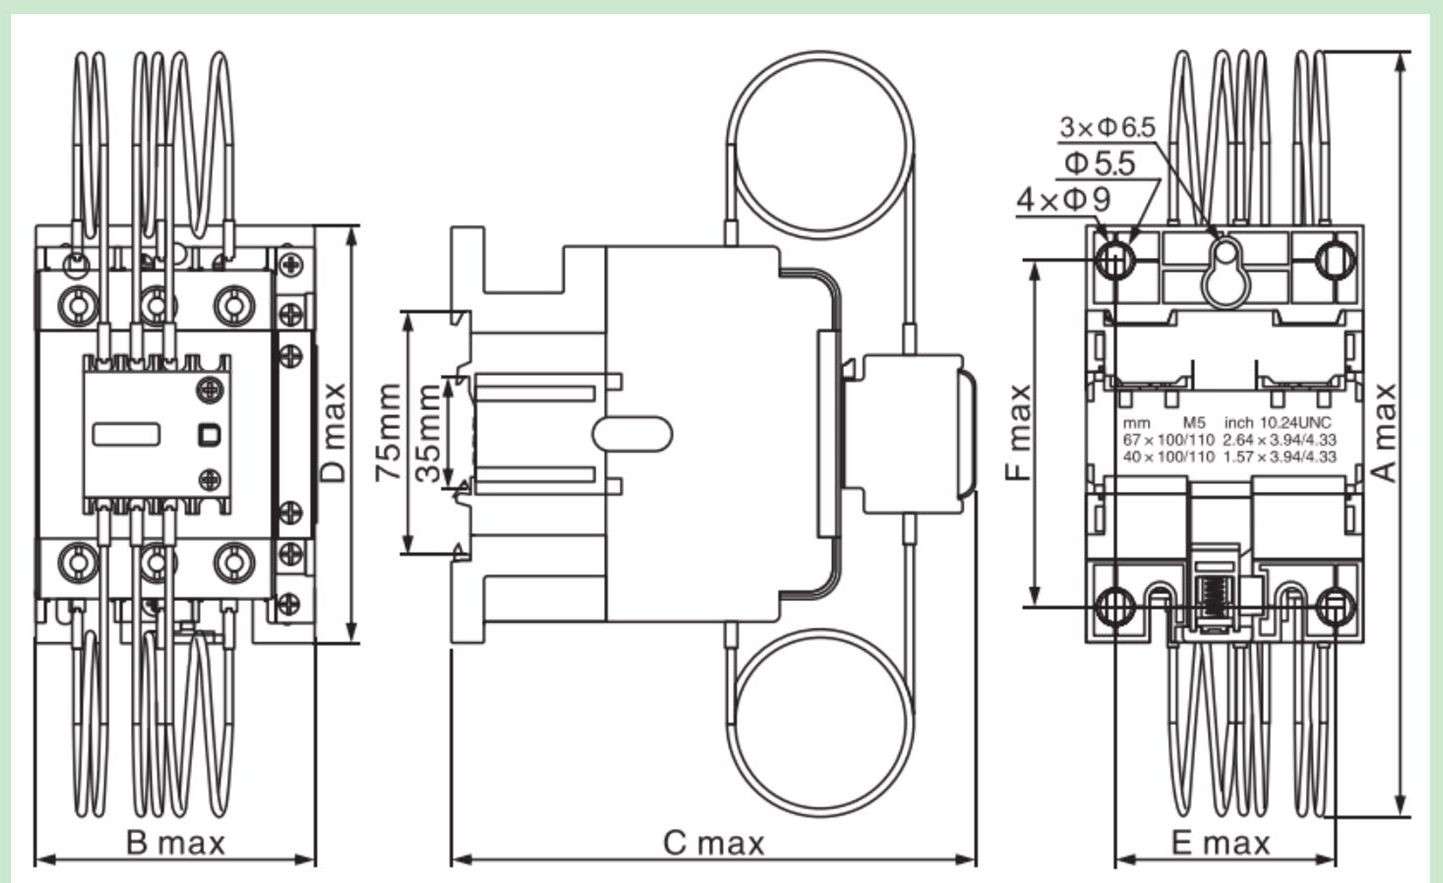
Outline and installation dimensions of CDC19s-63, 95, 115
